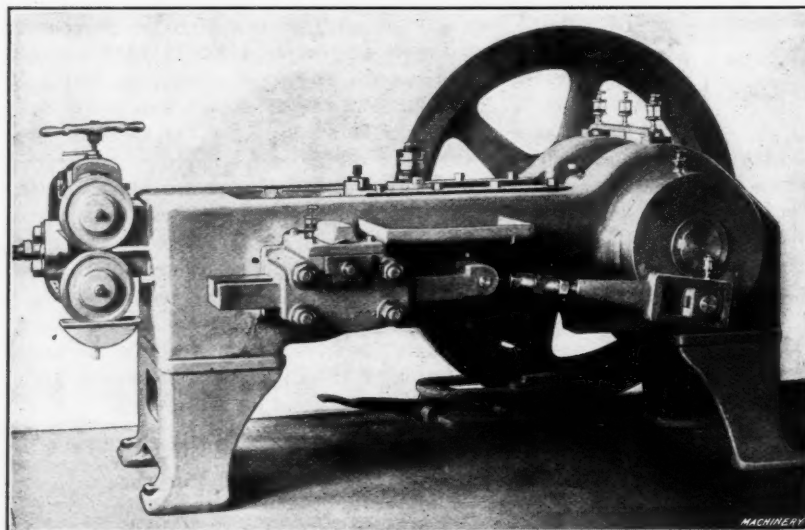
Single-stroke Solid-die Cold-header—E. J. Manville Make
